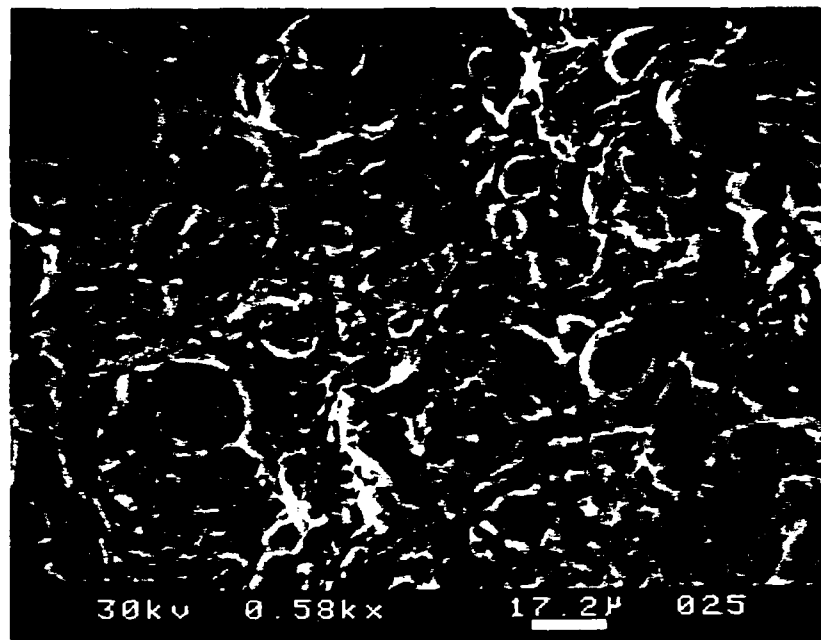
Dimpling on the fracture surface of the HIP sample (580X).
